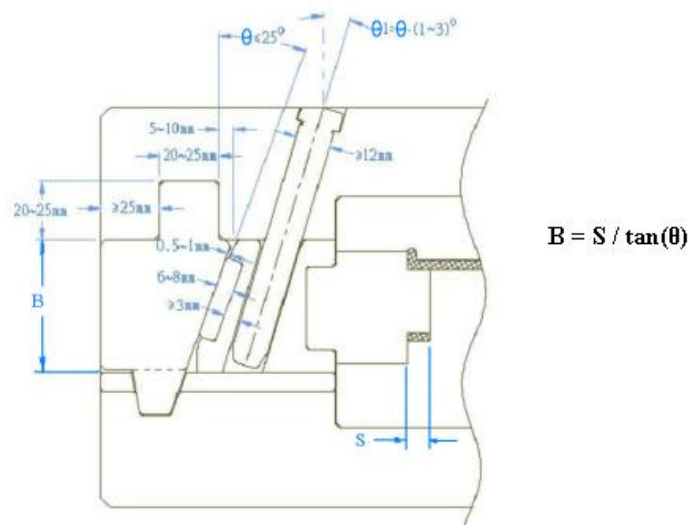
Dimensional relations of a typical slider design (Courtesy: Luen Shing Tools Limited)
